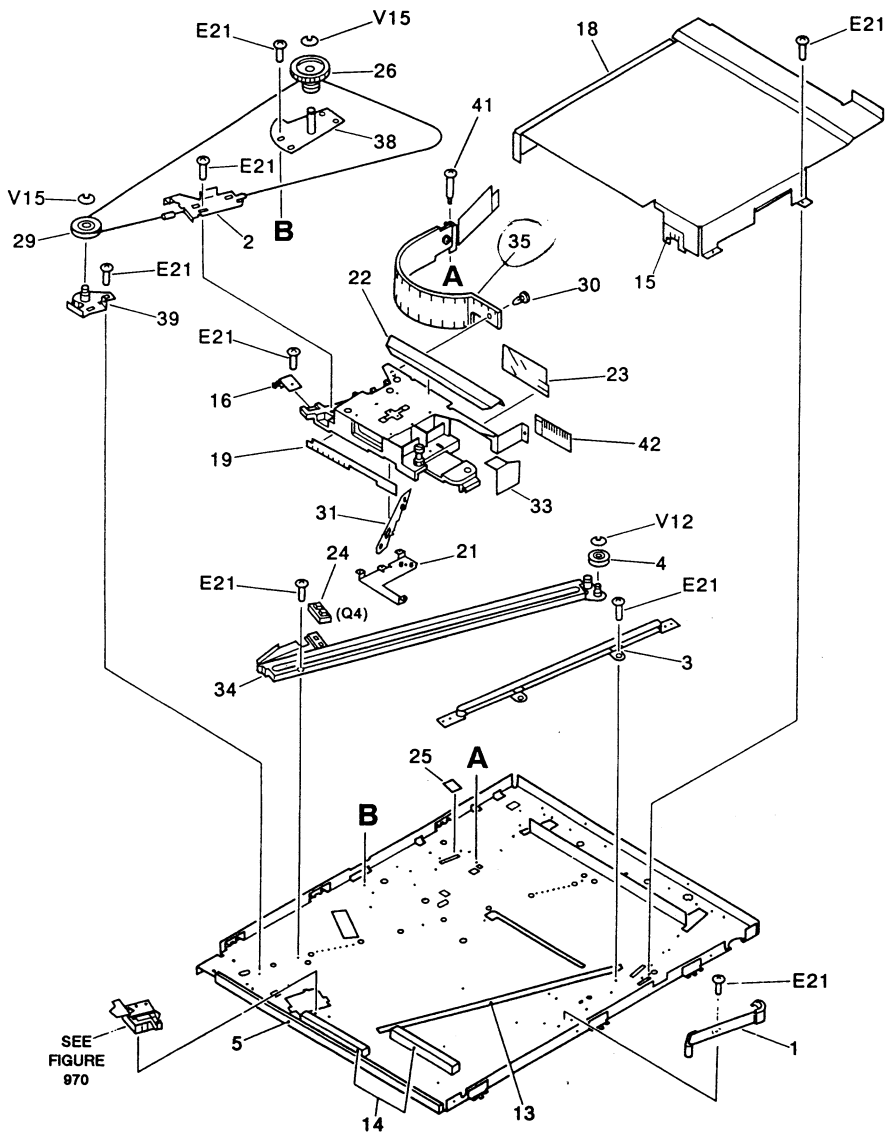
LENS MOUNT ASSEMBLY ($2/2$)
